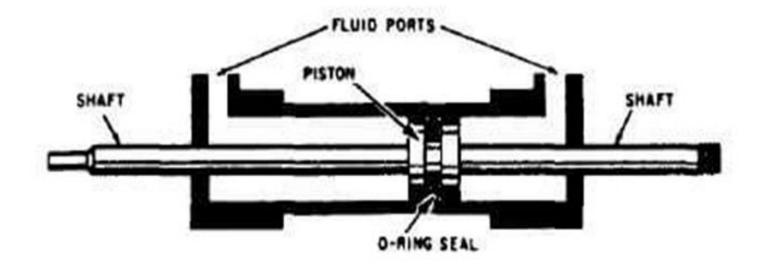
Balanced, double-acting piston-type actuating cylinder.
